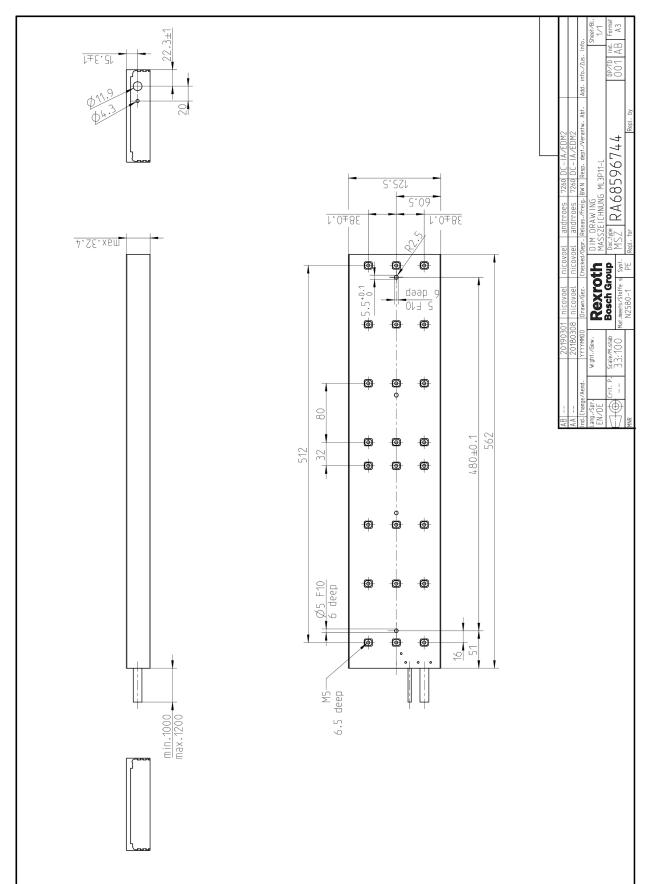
Dimension sheet ML3P11 primary part, frame length L
